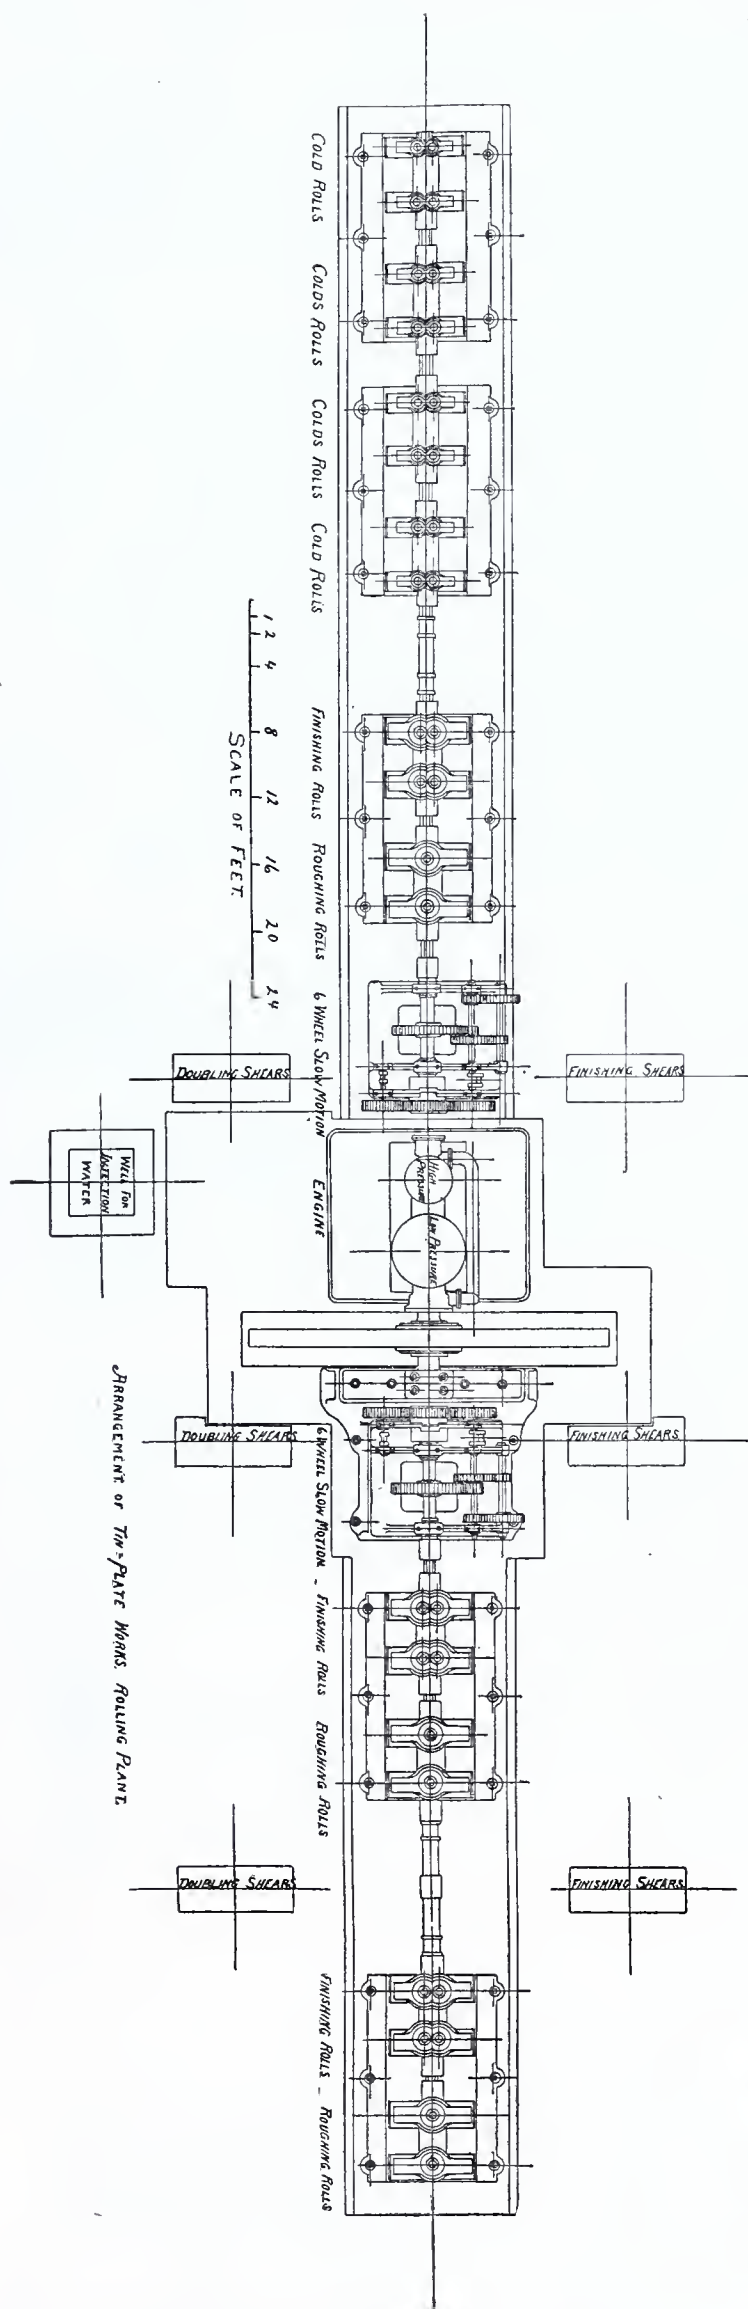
An English Tin Plate Rolling Plant.. Plan
